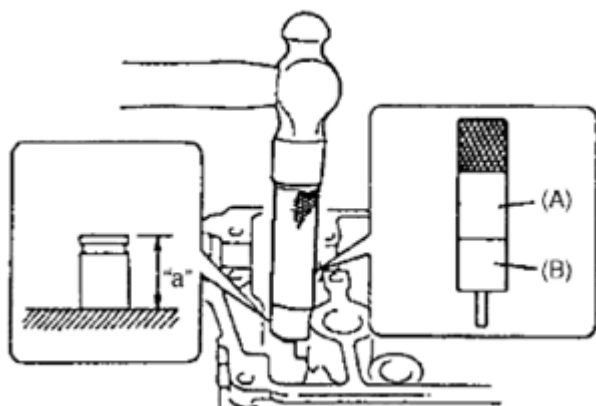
Identifying Intake Valve Guide And Exhaust Valve Guide Dimension
